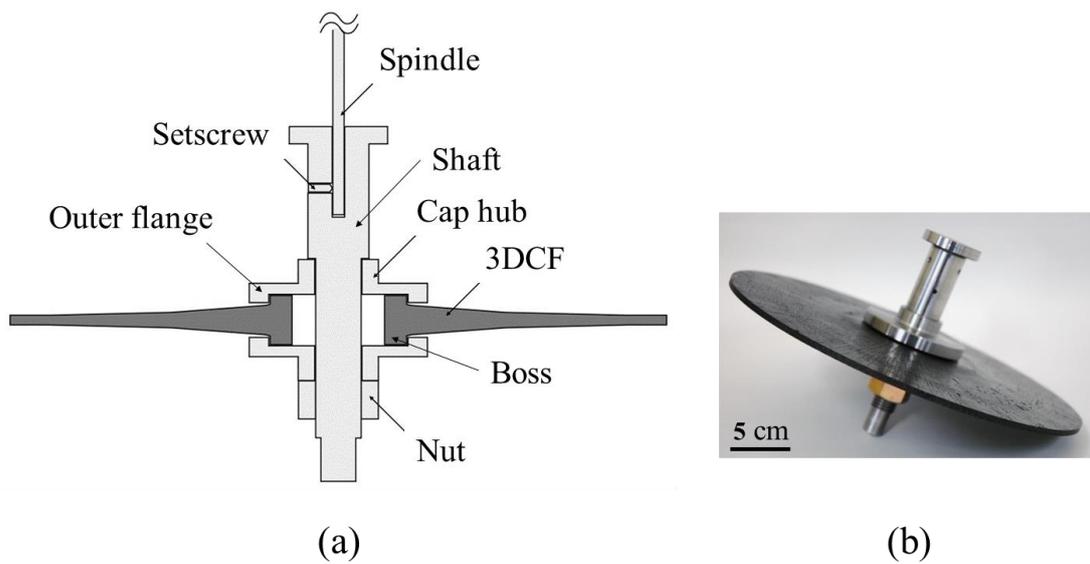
Type I test fixtures for spin test (Cap hub): (a) assembled fixtures, and (b) outlook of the specimen with the fixture.
